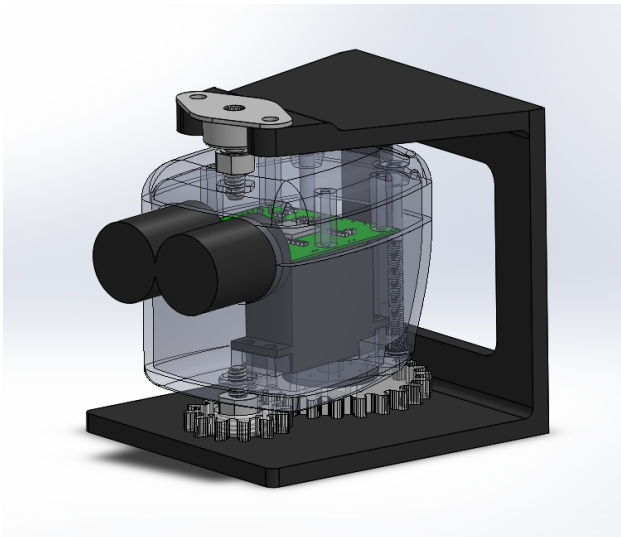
A 3D view of the internal mechanical design of the Laser Rangefinder. This design shows the positioning of the microcontroller within the casing of the Laser Rangefinder.
